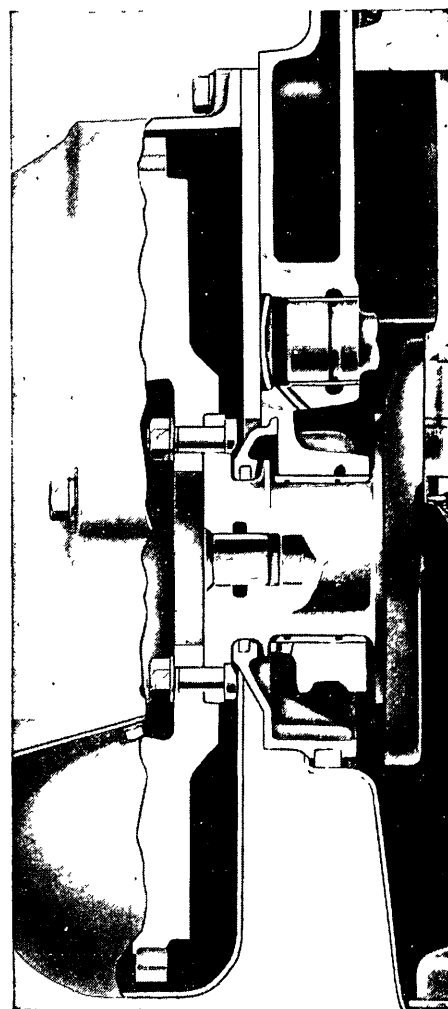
Details of camshaft and crankshaft at rear, 1947-50. 1951-52 construction is similar except that rear main bearing has flanges to control crankshaft end thrust
